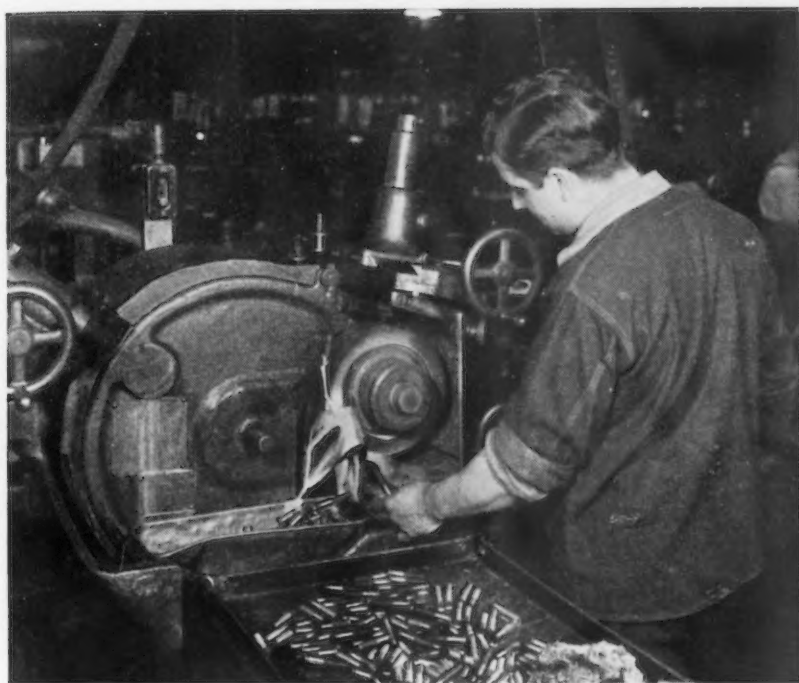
Centerless grinding is used in a number of instances. This shows the operation applied to cam roll studs.
